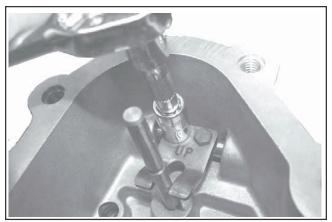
Removing Cross Shaft/Yoke Screws.
